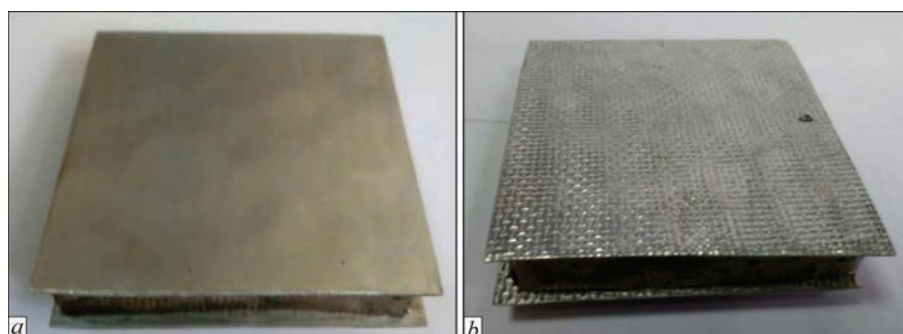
Model specimen of a three-layer honeycomb panel with lids of aluminium AMg2 alloy (a) and honeycomb panel with lids of layered composite Al-Ti-Al-Al material
